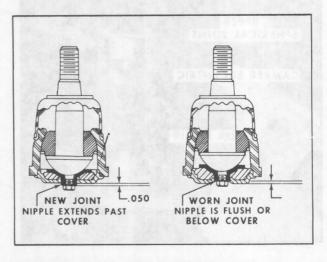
Checking Lower Spherical Joints (C-Car)
